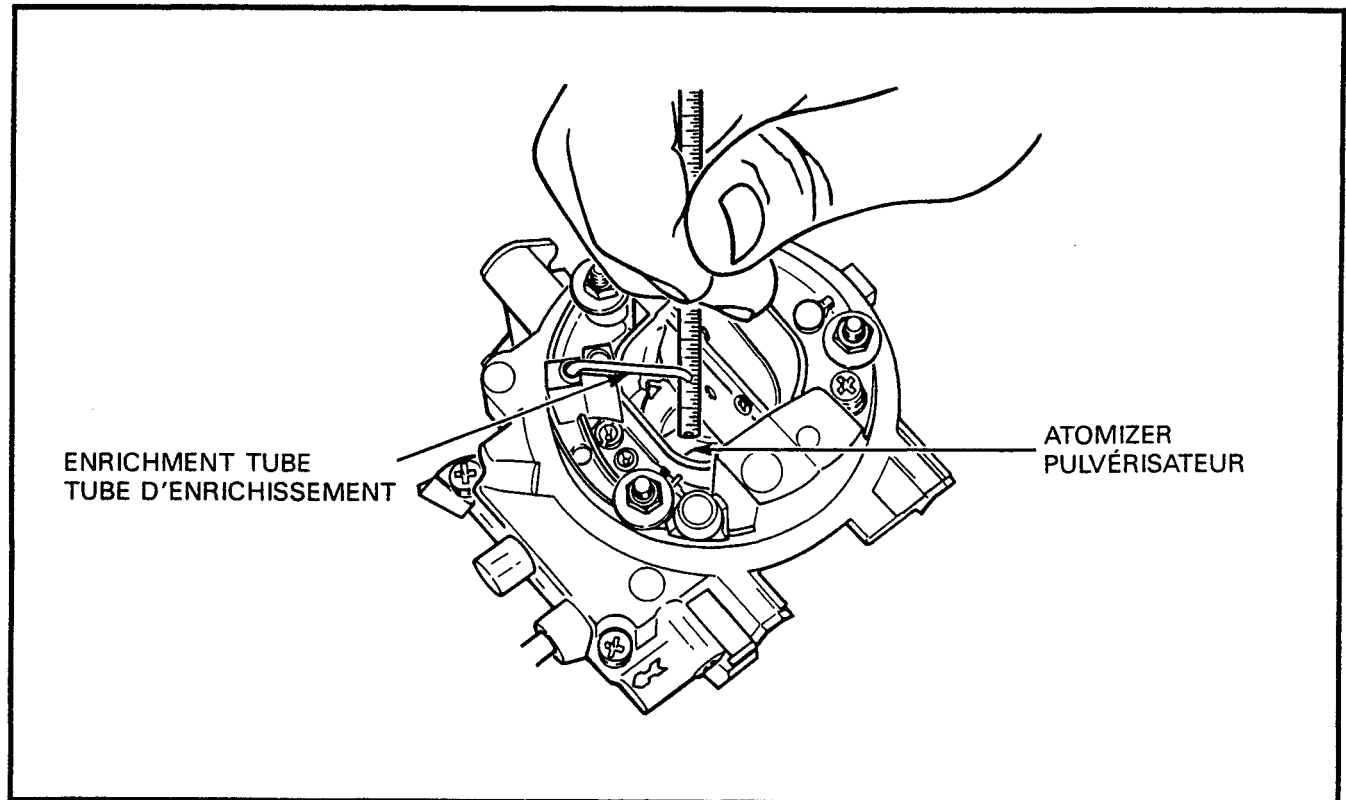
Carburetor Enrichment Tube Measurement
